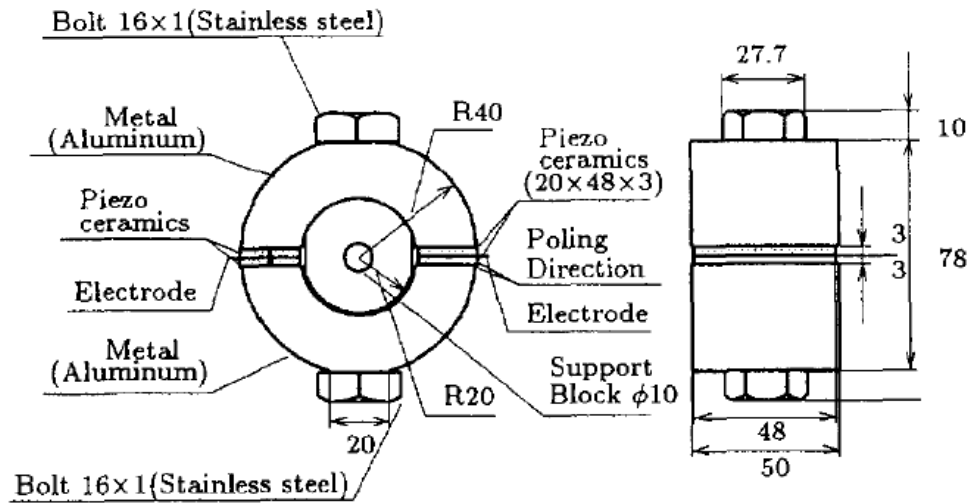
Shear mode ultrasonic motor prototype by Aoyagi [26].
